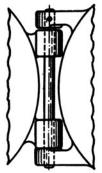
A poor design wherein all the thrust is taken on the lower case lug and the span of the cover lug is reduced.
